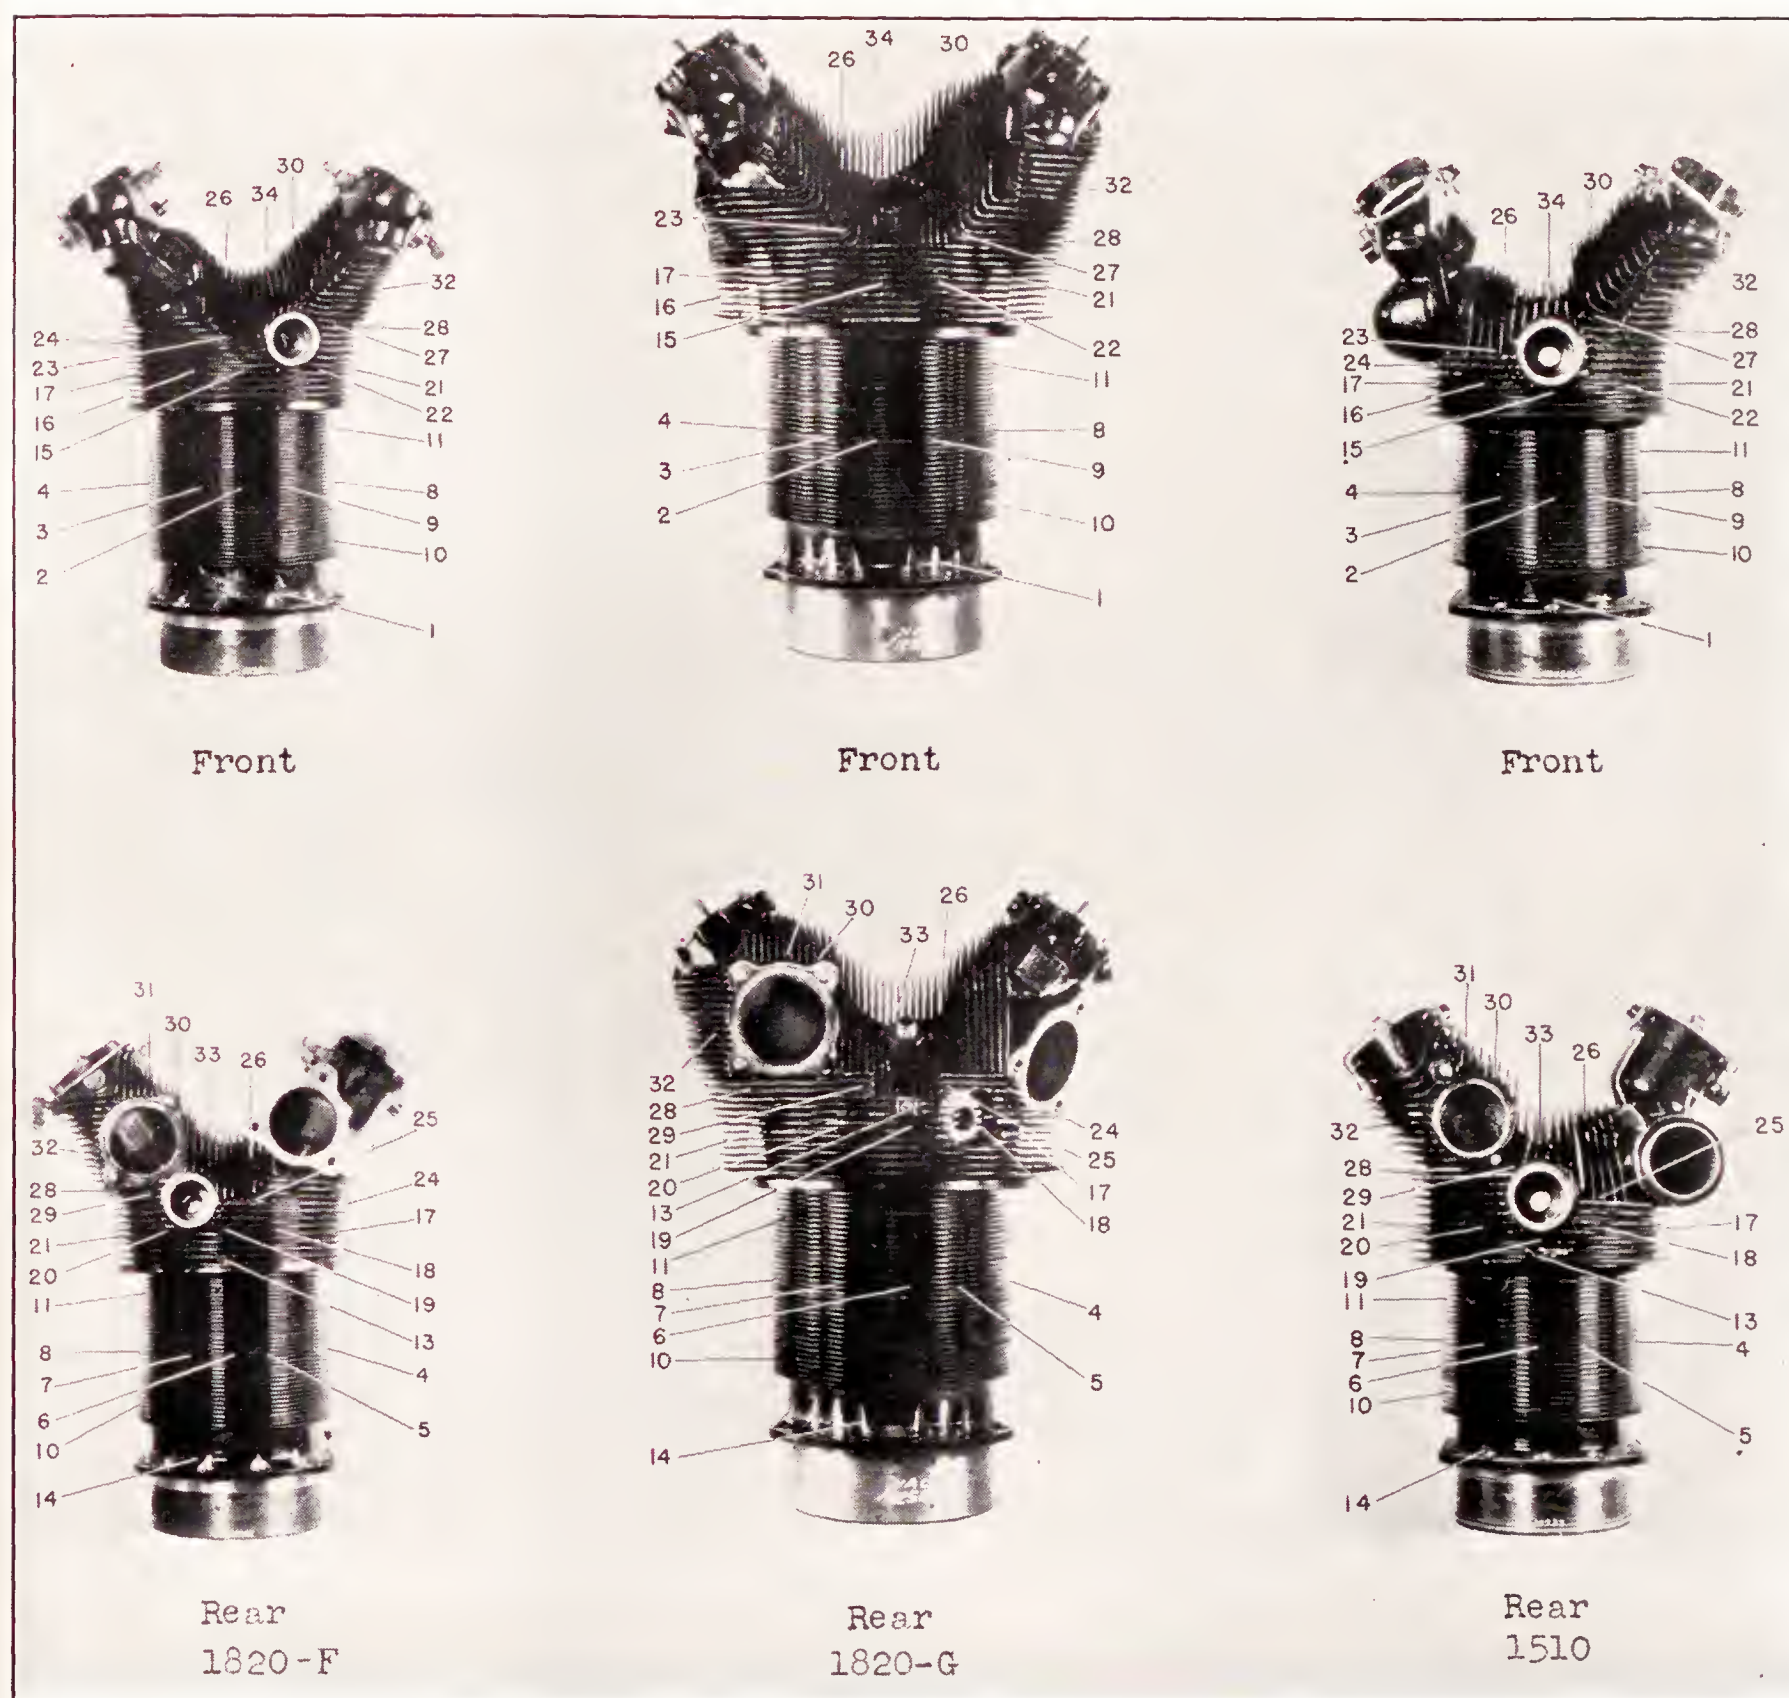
(b).—Front and rear views of cylinders from Wright engines showing location of thermocouples.
